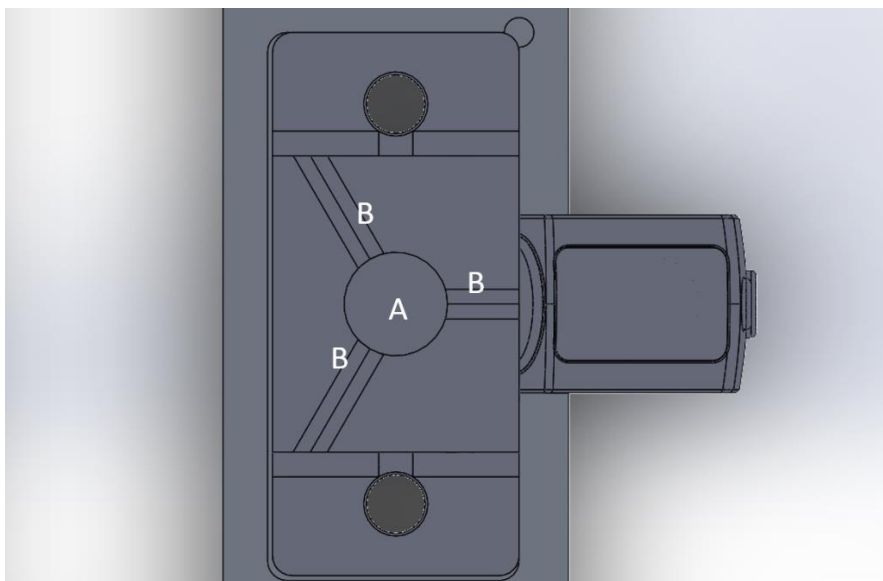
Top view of laser mount component. A: Pocket for magnet, B: Positional channels.
